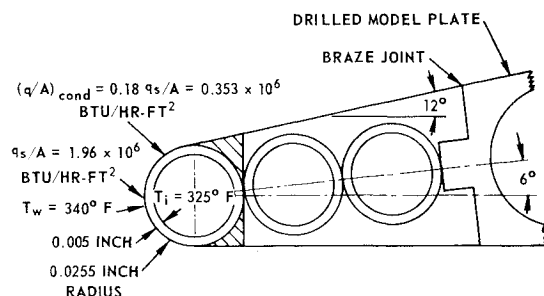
Sketch showing heat-transfer surface for leading-edge tube.
